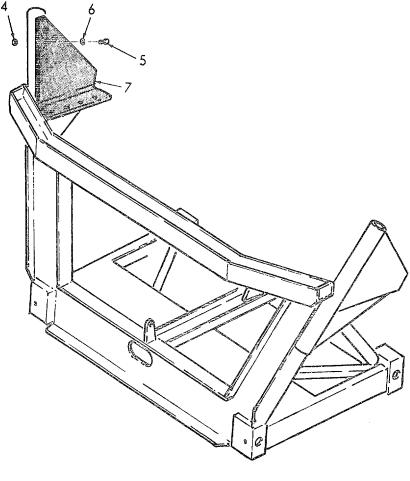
Cradle and dolly assemblies (Sheet 1 of 2).
